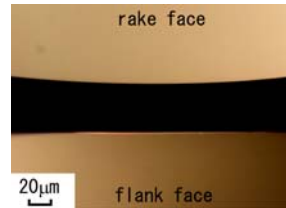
Microphotograph of tool edge after cut at the cutting speed of 190 mm/min
